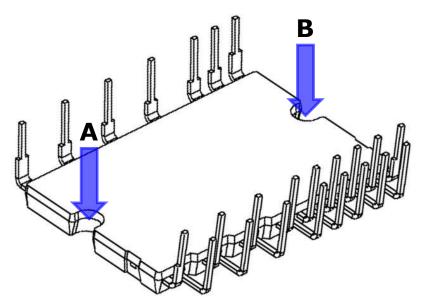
Reommended screw-tightening order : Pre-screwing $A \rightarrow B$, Final screwing $A \rightarrow B$
